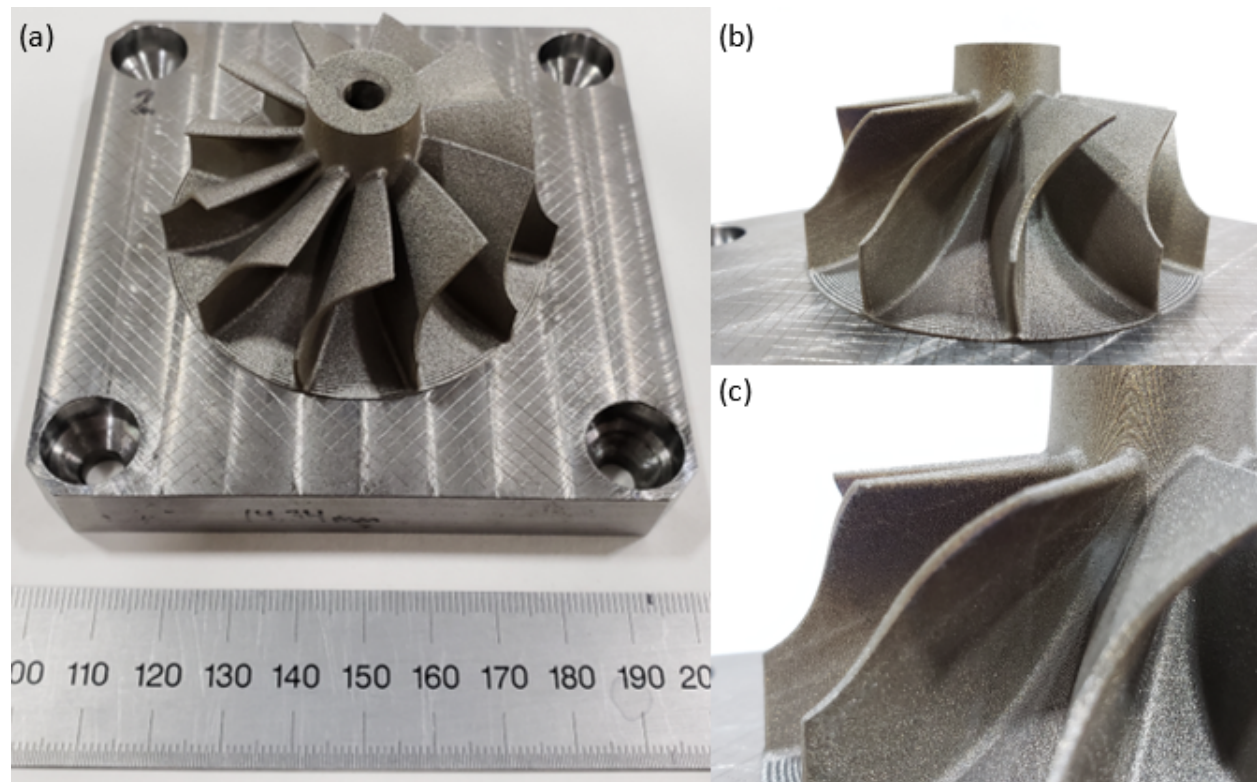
(a) As-fabricated turbo wheel printing from Maraging Steel (b) Isometric view of turbo wheel and (c) Close up showing the downskin surface finish.
